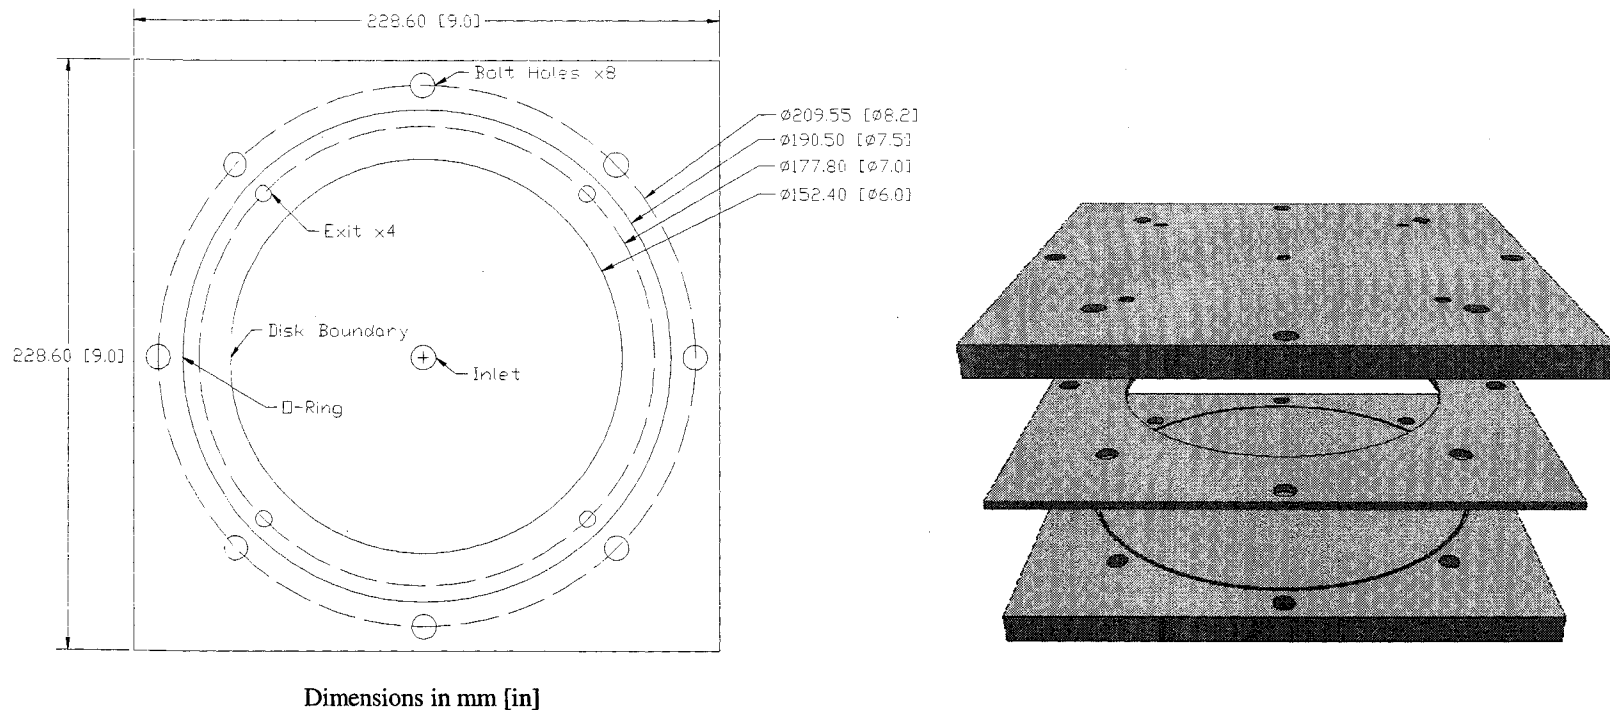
Top view of the disk-shaped mold cavity used to fabricate resin transfer molded disks (left) and exploded view of mold cavity components showing top plate, spacer plate, and bottom plate (right)
